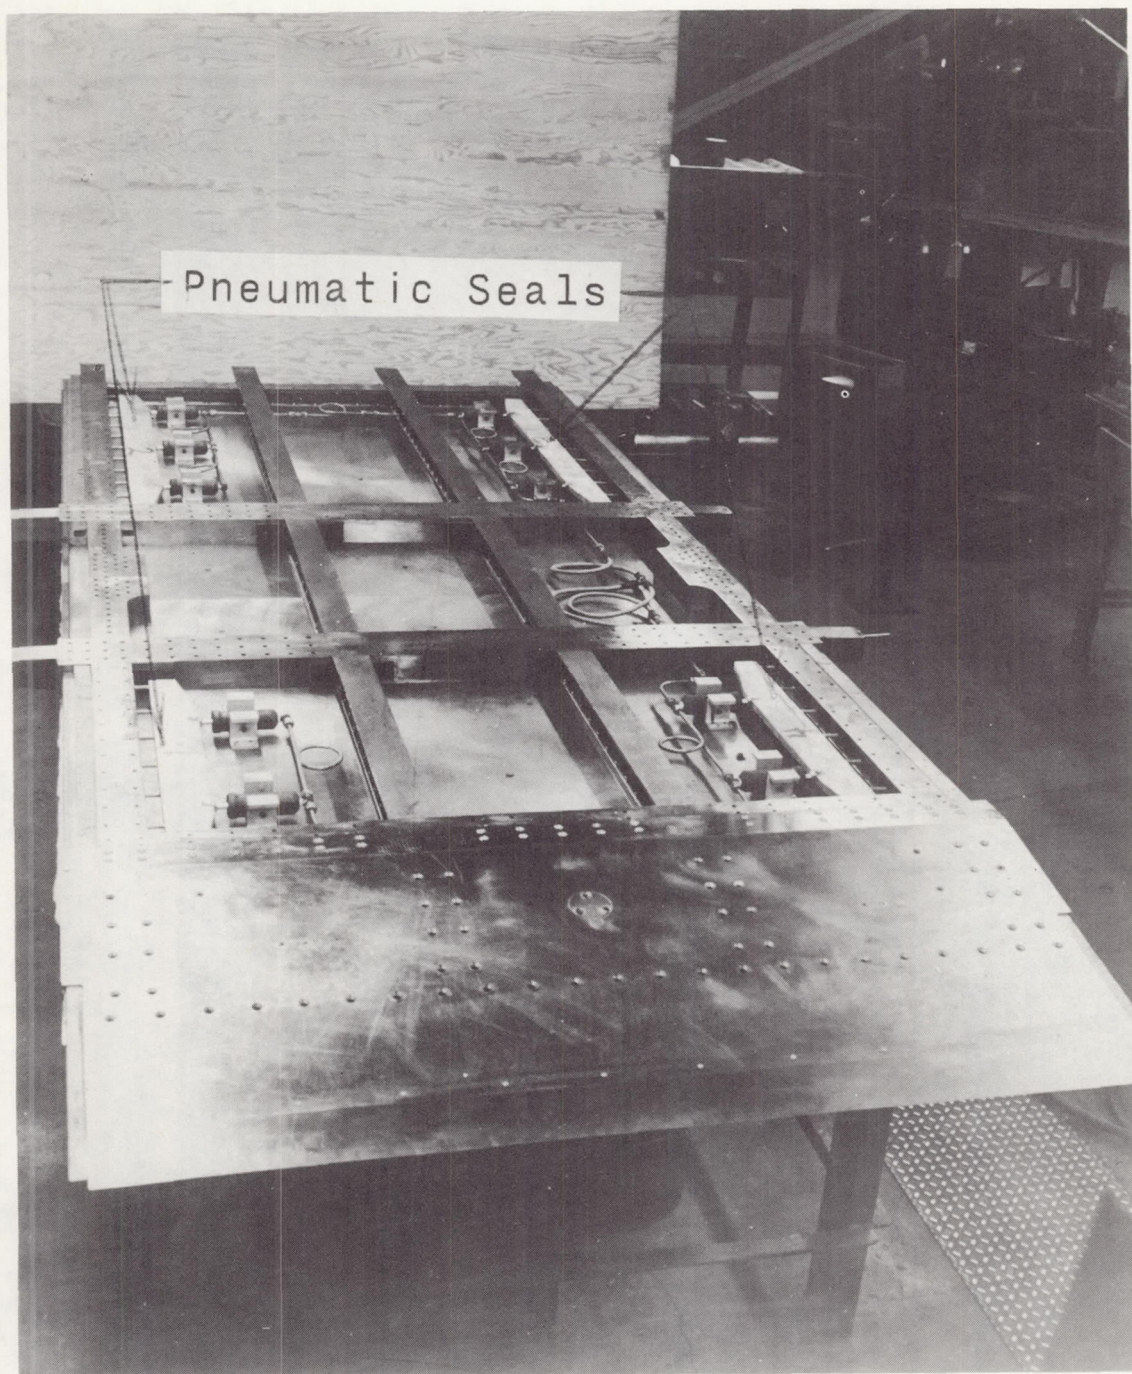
Wing-type support interior showing pneumatic seals. L-62-2091
